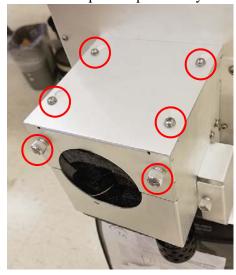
Left: Head connection cover thumbscrews (DSC 25XX).
